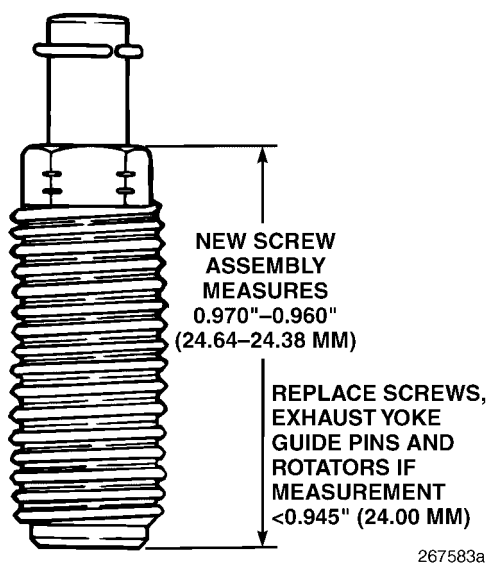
Measuring Actuating Pin Adjusting Screw Assembly
